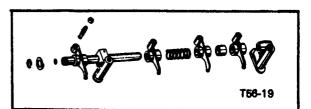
BC-144 VALVE LEVER ASSEMBLY
